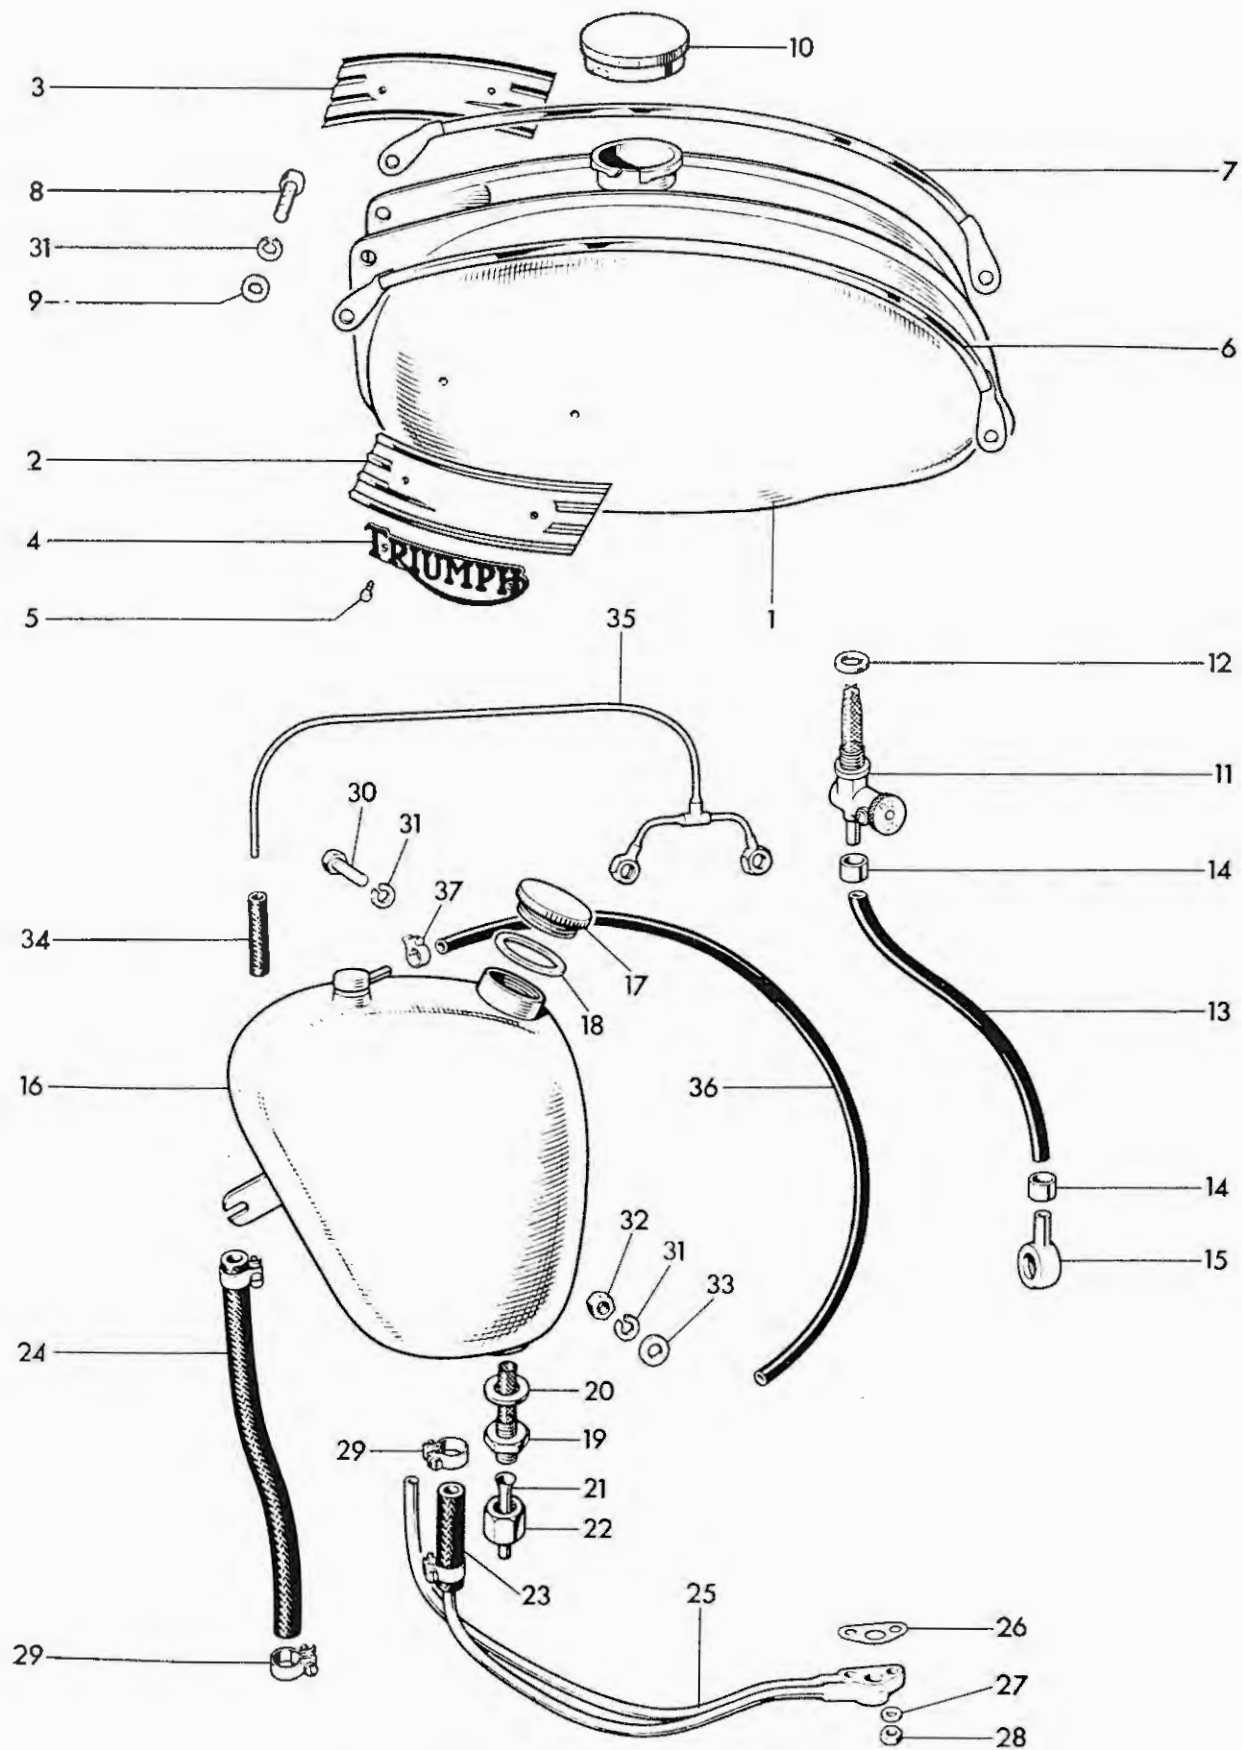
PETROL AND OIL TANKS, SUPER CUB
